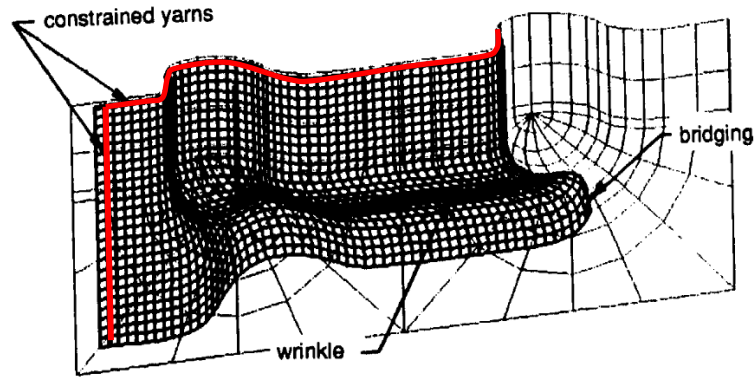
Draping Model with Bridging and Wrinkle [52]
